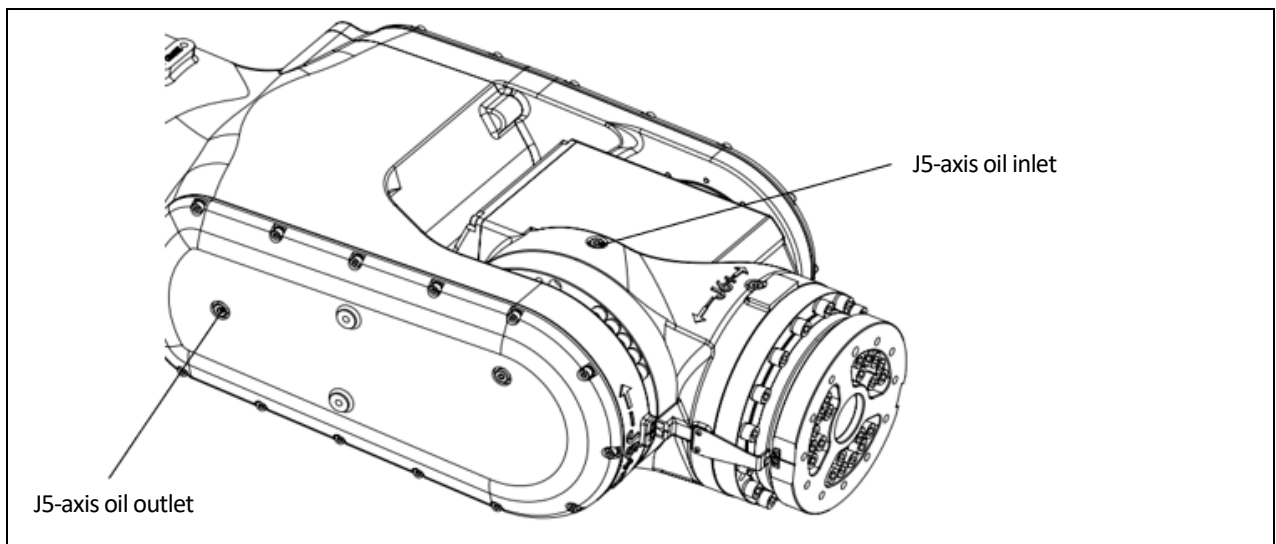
J5-axis oil inlet/outlet (ER270-2700)
